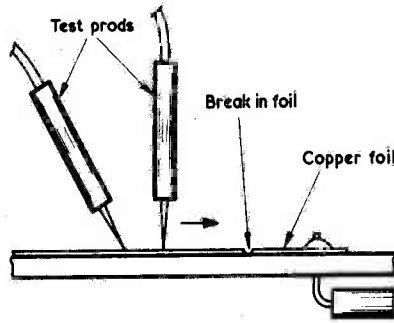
In some cases, fractures in the copper foil of a printed circuit board may be located by holding two test prods against it, sliding one away from the other. The test prods connect to a testmeter switched to read resistance
